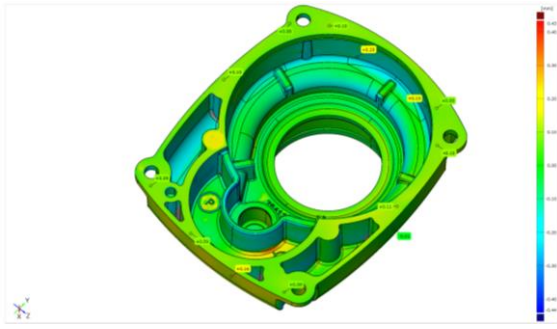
Mutual alignment of the reference CAD prototype and the digitized STL model of the upper half of the mixer gearbox (chip-machined selected casting surfaces) [GOM GmgH]
